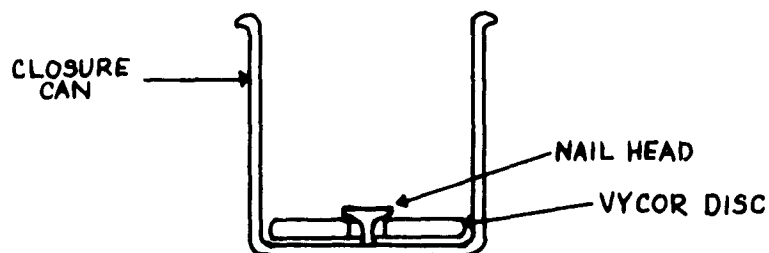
Proposed Nail Head Can Getter Assembly.
